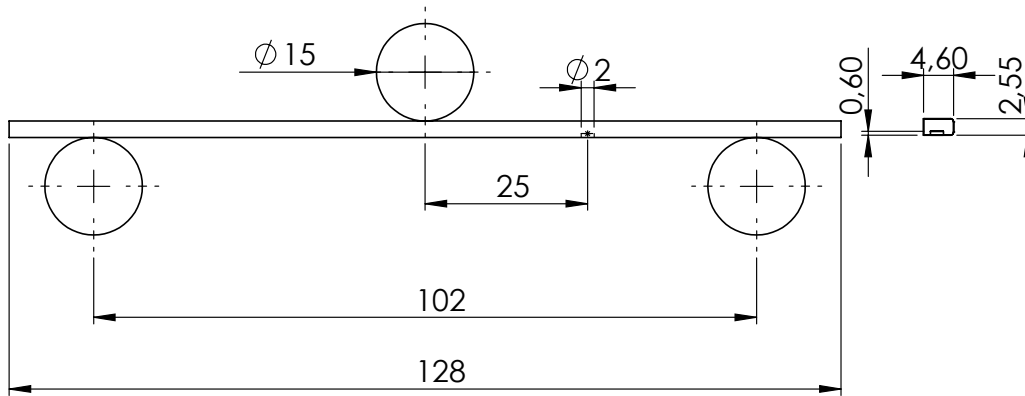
Three-point bending setup with sample and right-side defect dimensions (dimensions in mm).
